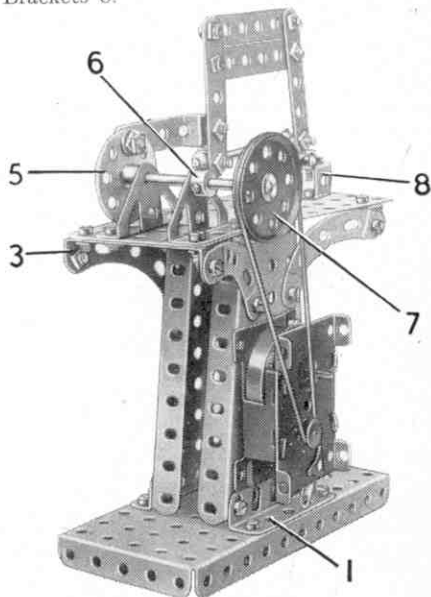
This view of the metal saw from the rear shows how the driving Motor is fitted.
